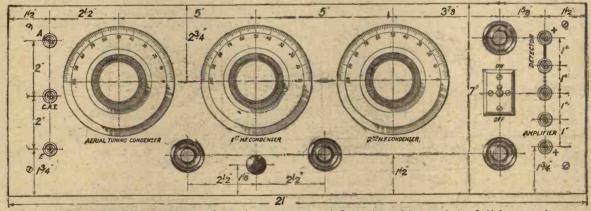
Dimensioned drawing of the front panel. A full-sized blue print of this panel may be obtained from the publishers, price 1s. 6d. post free. Ask for Blue Print No. 129a.
